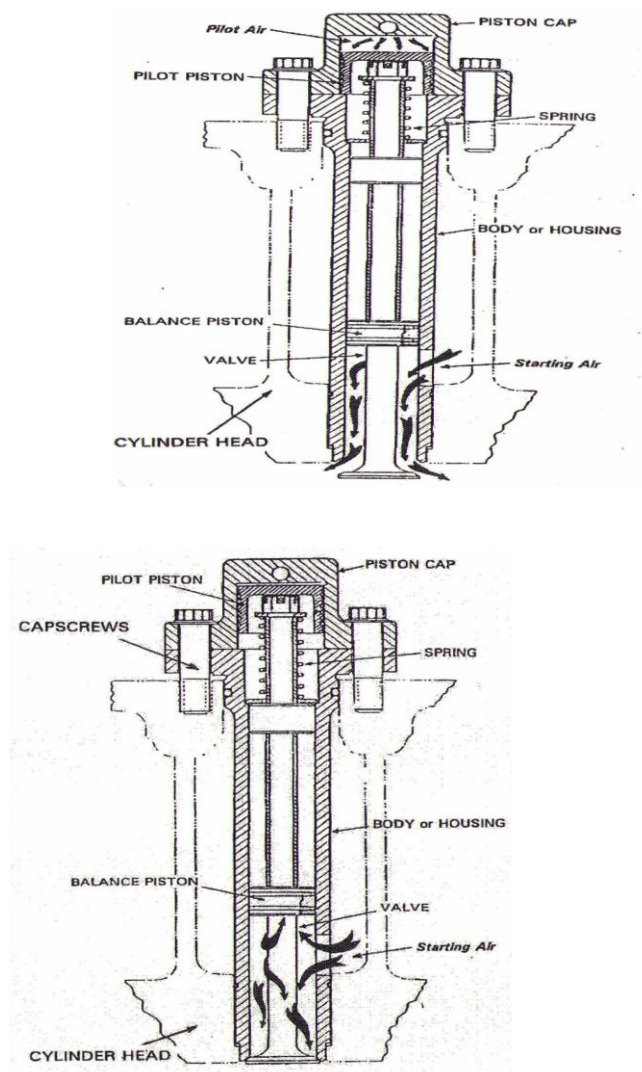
Starting Air Check Valve - Open, Figure 2.16 Starting Air Check Valve - Closed[12]
